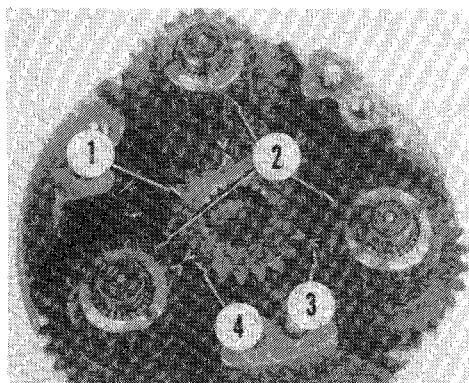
A—When installing B2 sun gear (1), make certain “V” marks (4) on sun gear are aligned with “V” marks (3) on planet pinions (2).
